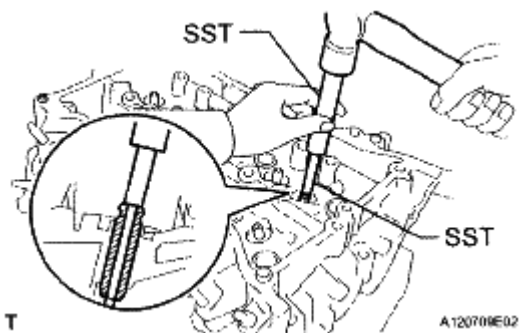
Using SST & Hammer To Tap Out Exhaust Valve Guide Bushes
